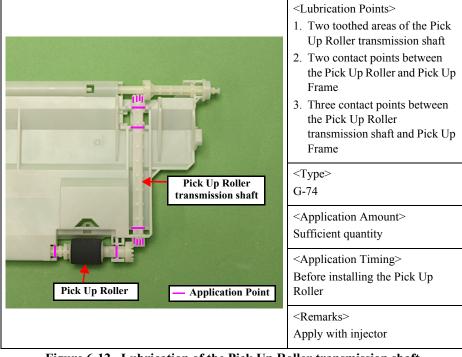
Lubrication of the Pick Up Roller transmission shaft
